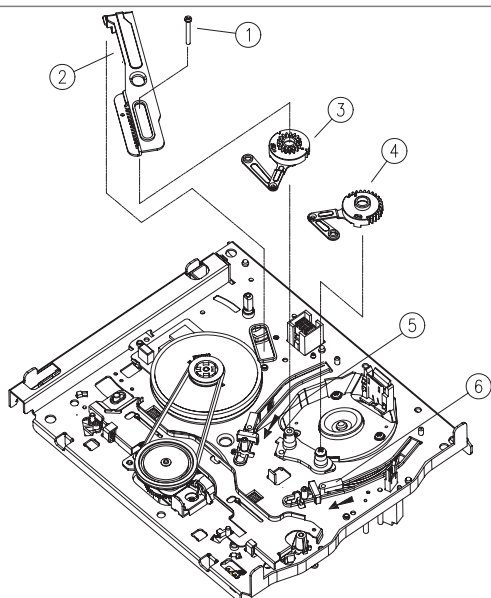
Disassembly of the LOADING RACK, LOADING ASS'Y and the SLANT POLE ASS'Y
